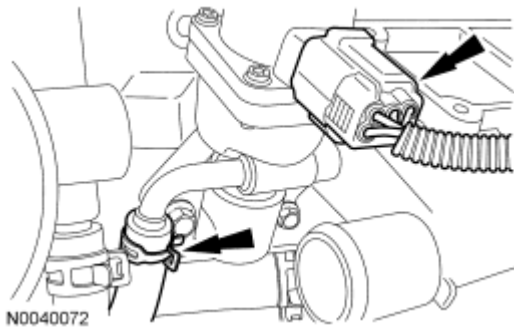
Locating Exhaust Gas Recirculation (EGR) Coolant Hose And Electrical Connector
